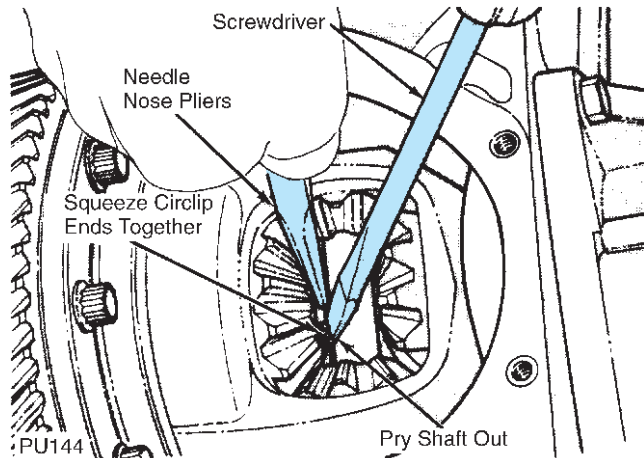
To remove the inner CV joint from the transaxle on this FWD vehicle, it is necessary to remove the transaxle differential cover and expand the circlip tangs. (Courtesy of DaimlerChrysler Corporation)
